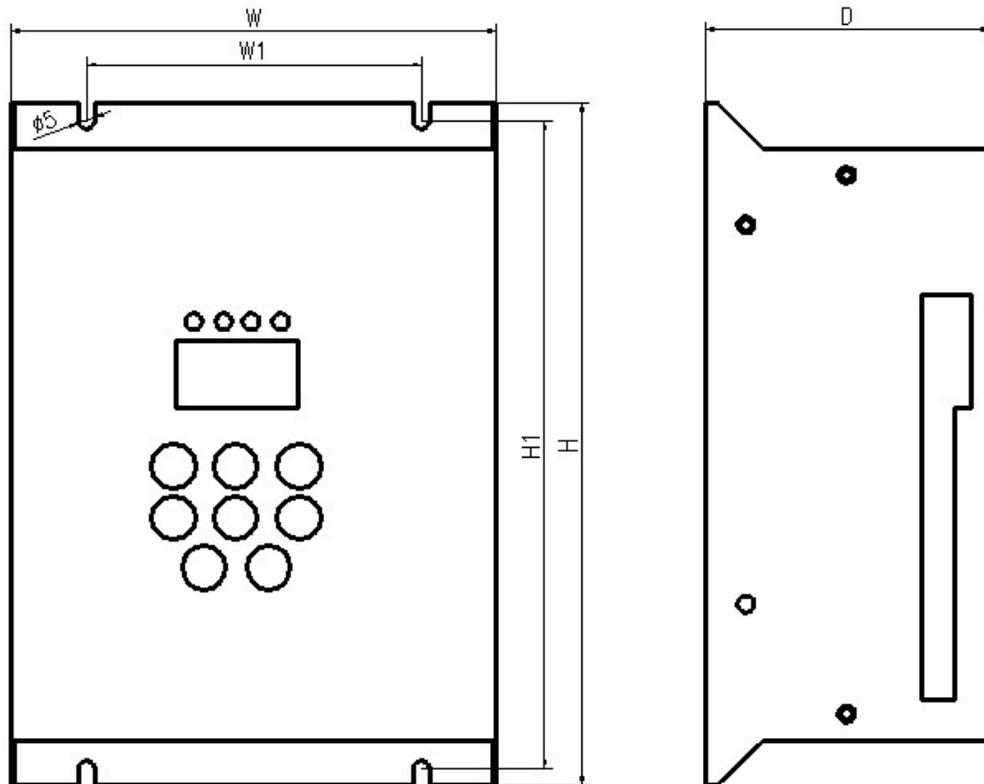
EXTERIOR DIMENSIONS OF STANDARD TYPE
